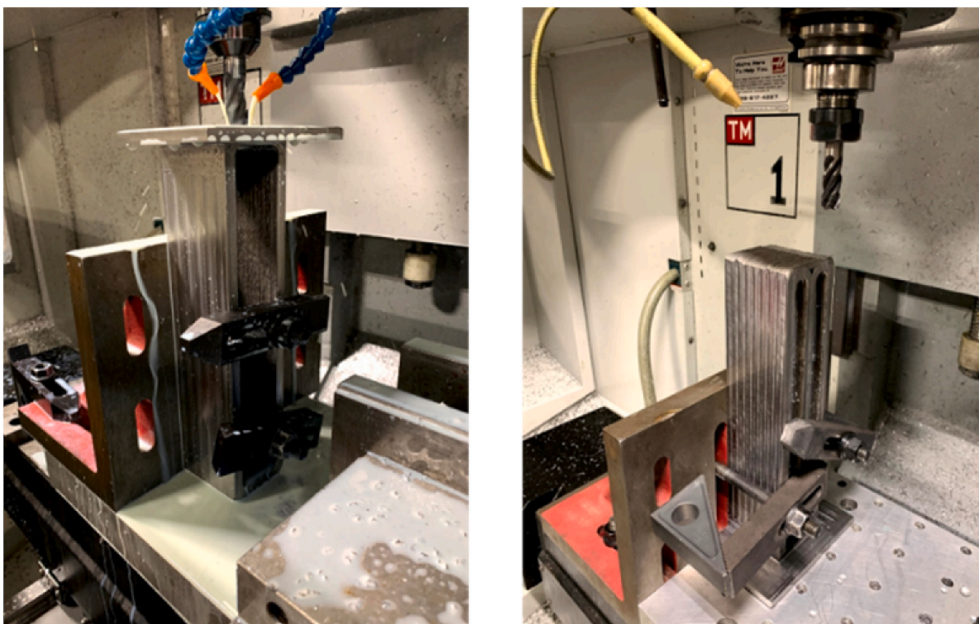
The parts were fixtured to an angle plate to finish the top and bottom surfaces.
